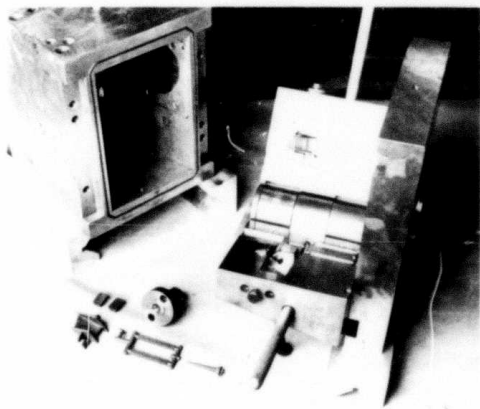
TSE331C-1 Stator Vane Injection Molding Tooling from ACC.
